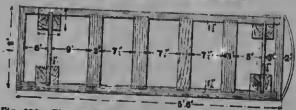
Plan of Bottom Frame of Cromwell Couch.
